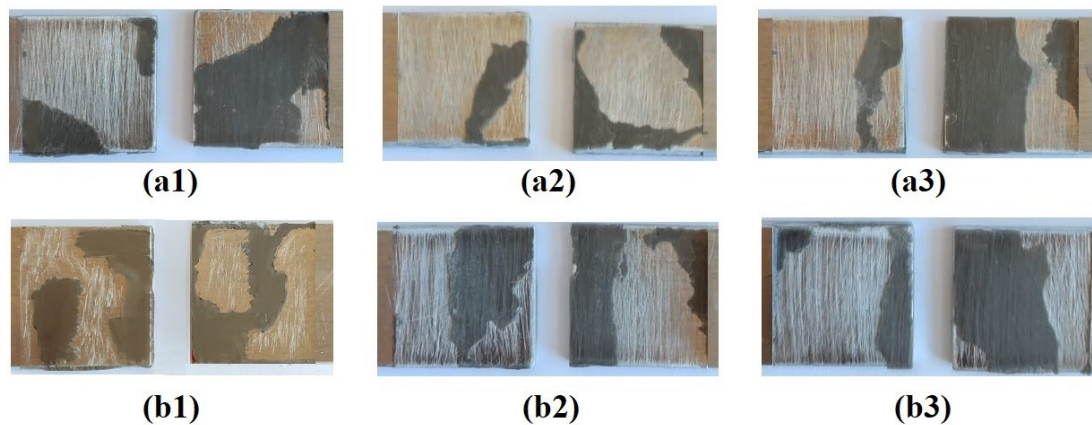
Surface damages of the samples; adhesive thicknesses (a1:0.2 mm, a2:1mm, a3:2 mm) and loading speeds (b1:1 mm/min, b2:10 mm/min, b3:100 mm/min)
